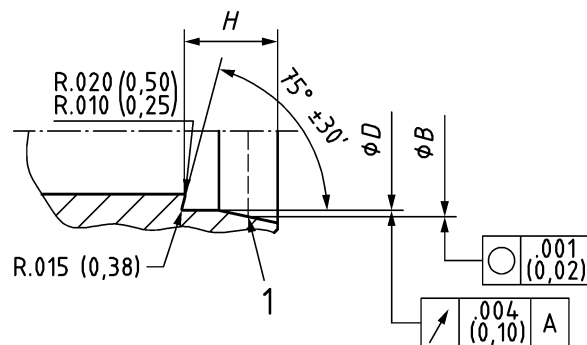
Configuration, dimensions and tolerances of fitting end design, style B (same as style G except as shown)
